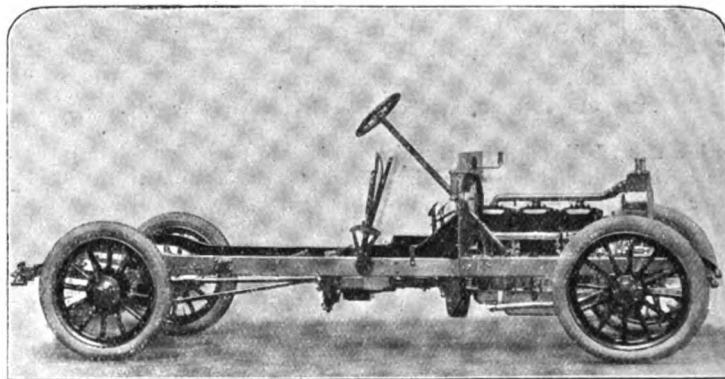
Chassis of Siddeley 20-30-h.p. Six-Cylinder Car.
